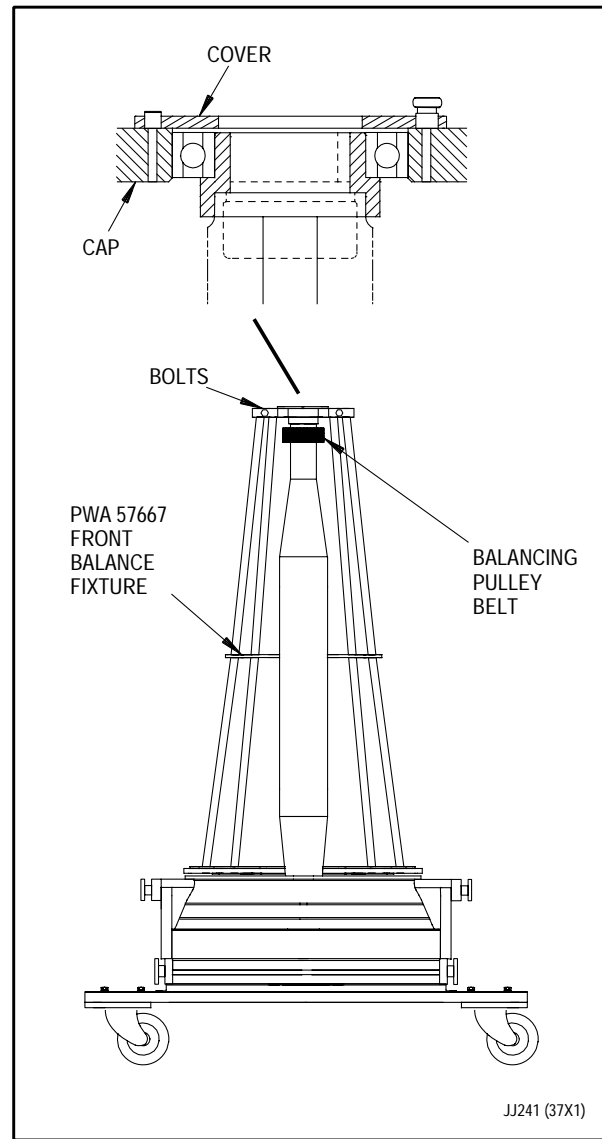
Front Compressor Drive Turbine Rotor and Stator - Installation of Balancing Tooling (Sheet 2 of 4)
